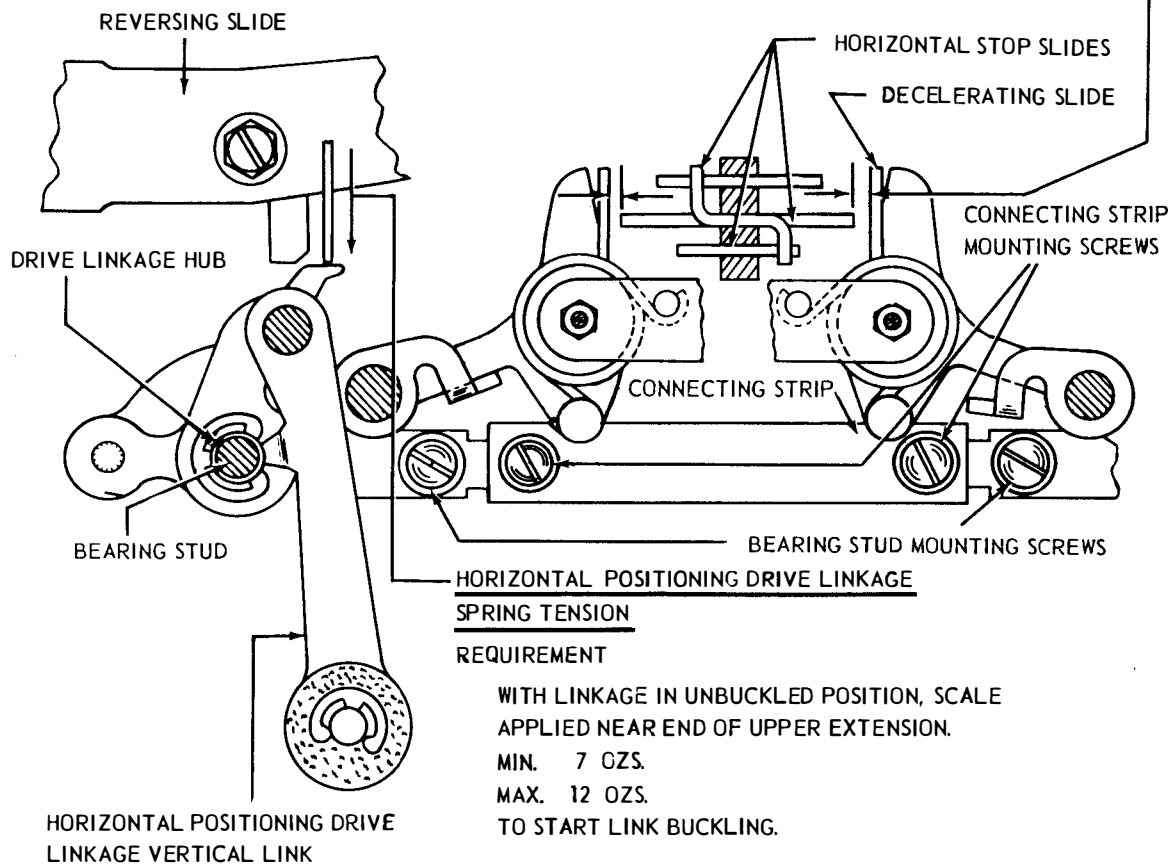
Automatic Typewriter, Horizontal Positioning Drive Mechanism, Front View
